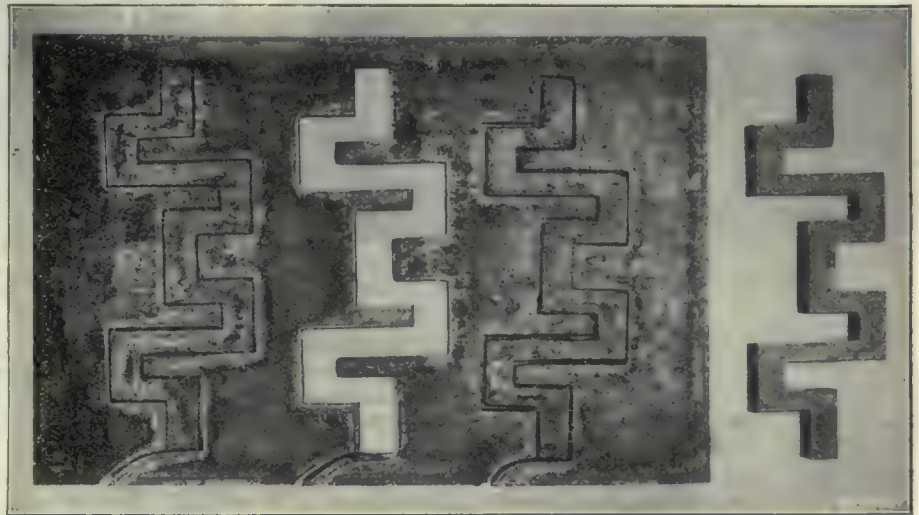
CRANKSHAFT BLANKS CUT FROM THE COLD SLAB BY THE OXYGRAPH APPARATUS.
